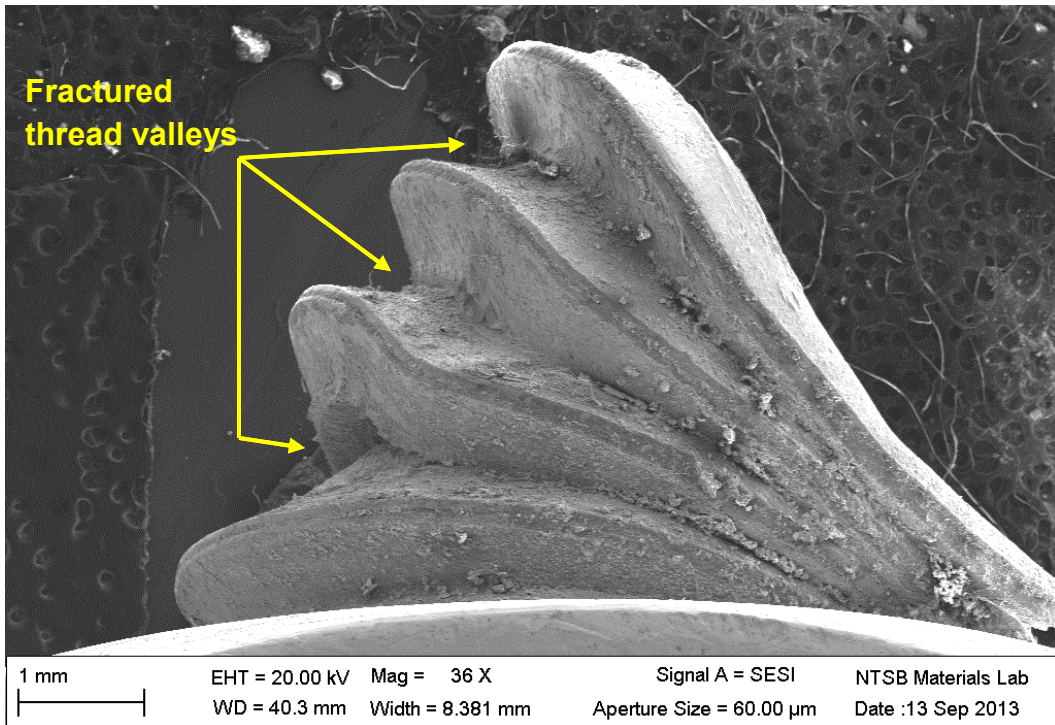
Secondary electron (SE) micrograph of the fractured threaded end, showing cracking in the thread valleys on one side and compression of the thread crests on the other.
